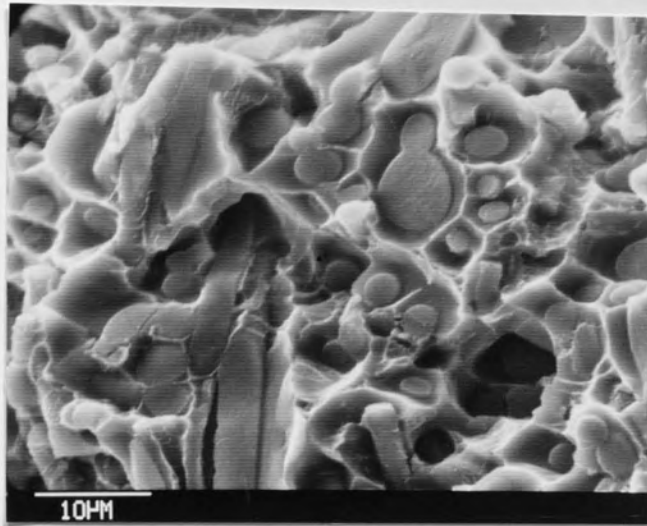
Fracture surfaces of Saffil/6061-T6 tensile specimens.
